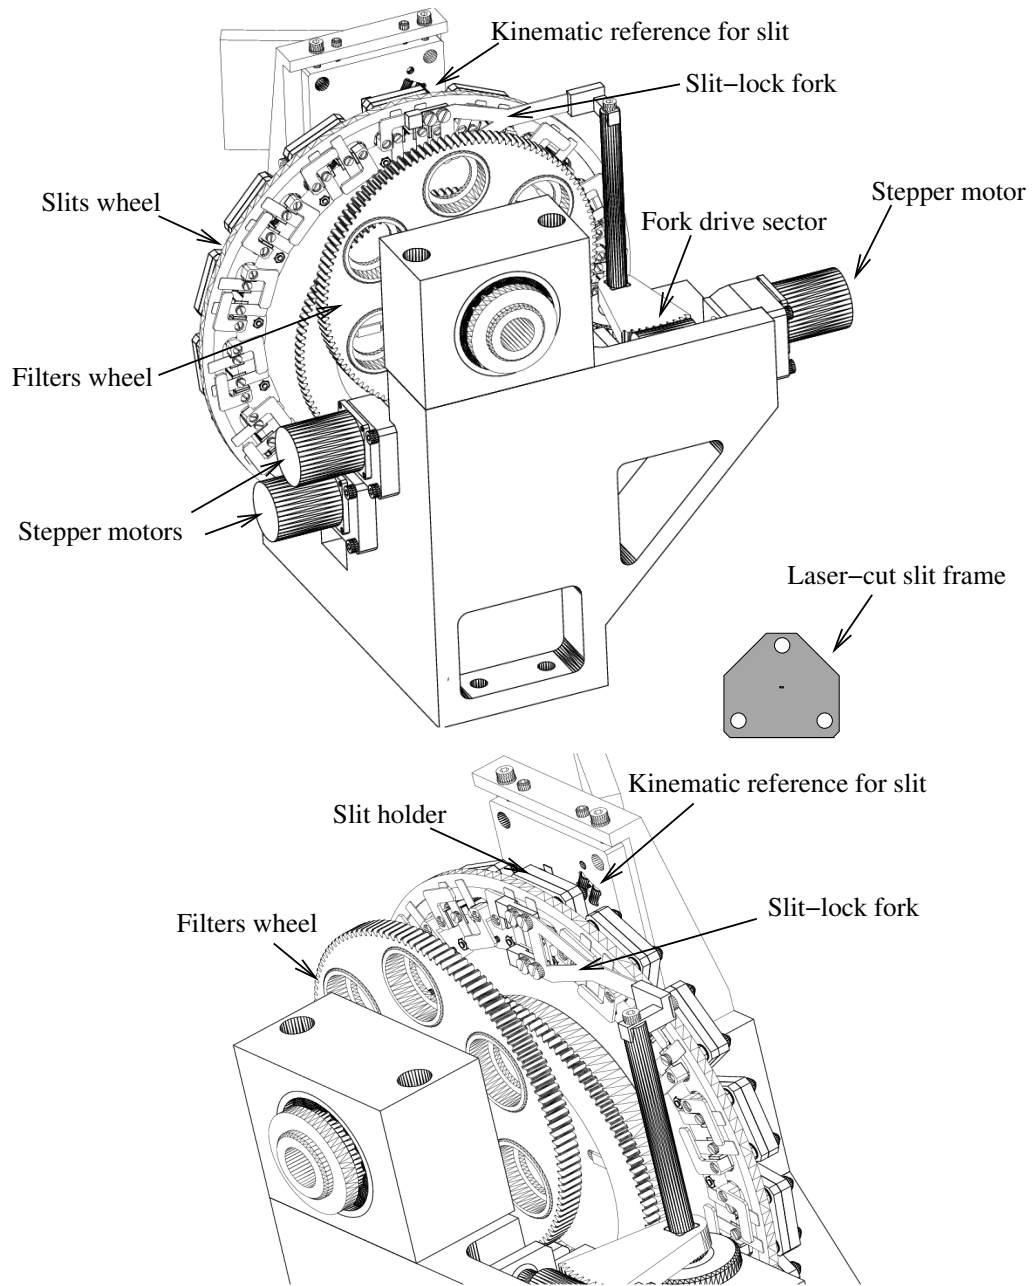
View of the mechanical system holding the slits and filters wheels. Each wheel is driven by a stepper motor (left in the upper panel) through a endless screw - toothed wheel combination with large backlash to prevent seizing when operated at cryogenic temperatures. The slit frame is a laser-cut sheet of steel with very precise (μm) positioning of the slit and reference holes. The slits are mounted inside steel holders with accurately machined cylindrical pins matched to the slit frame holes. The holders are elastically mounted in the wheel holes. To guarantee an accurate positioning of the slit relative to optical axis the slit holder, once in position, is extracted from the wheel and pressed against three kinematic points mounted on a rigid system behind the wheel. This movement is performed by the slit-lock fork which is driven by the third stepper motor. An electrical interlock system fed by micro-switches avoids collisions between the wheel and the fork movements.
